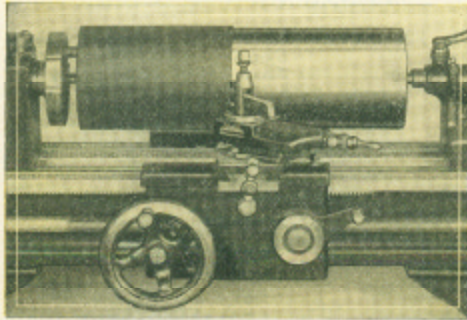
Machining a Steel Roll 6 $\frac{3}{4}$ Inches in Diameter and 18 Inches Long.
